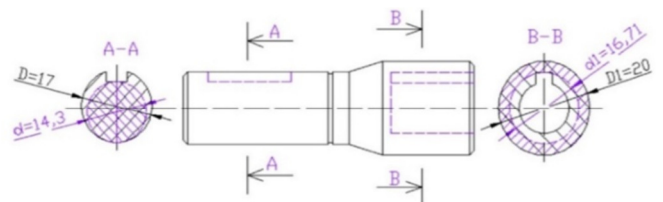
The support shaft of the drive arm and its two dimensioned cross-sections.
